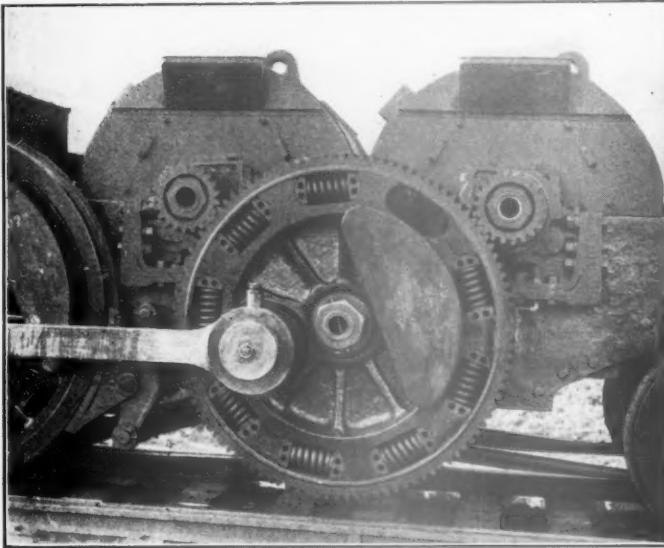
A View of the Jack Shaft With Its Spring Gear
